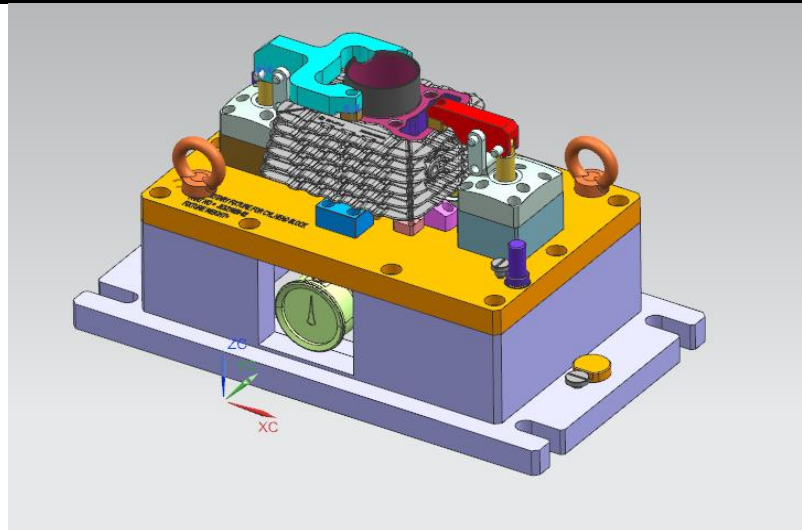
3D CAD model of Fixture assembly with cylinder block
